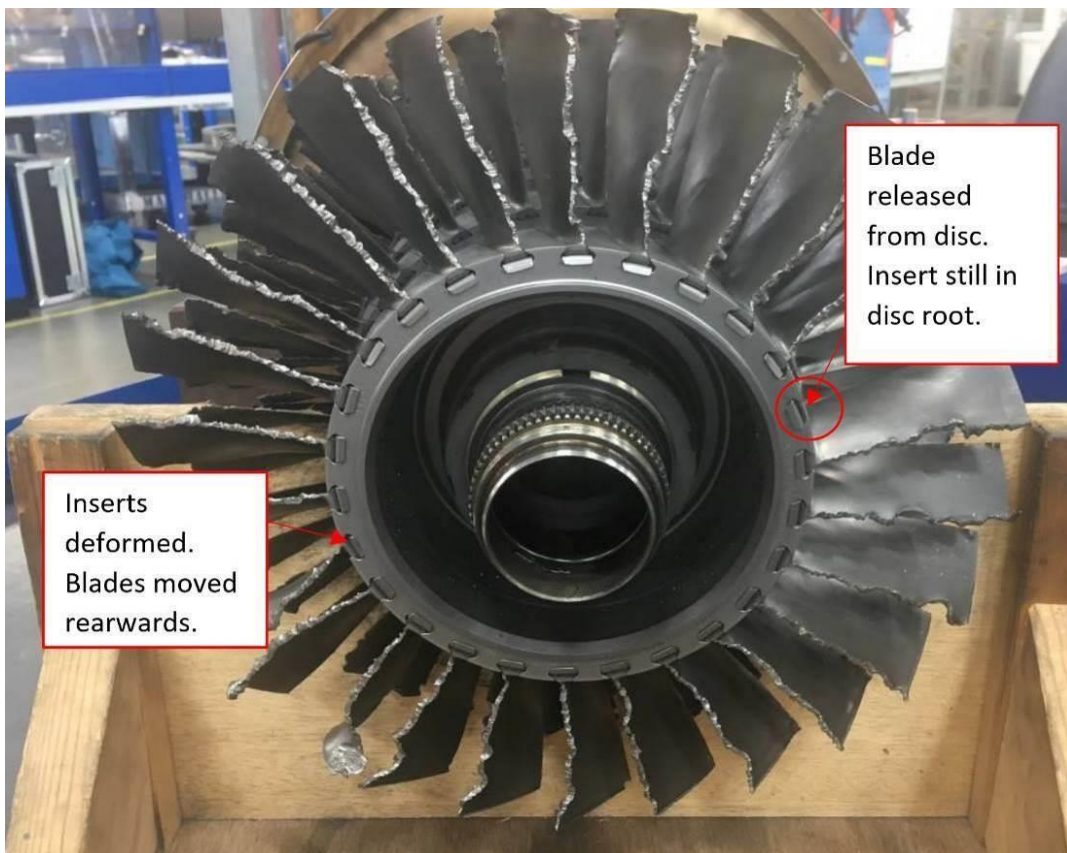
Compressor blade inserts deformed as the blades have moved rearwards. (Source: Standard Aero)
